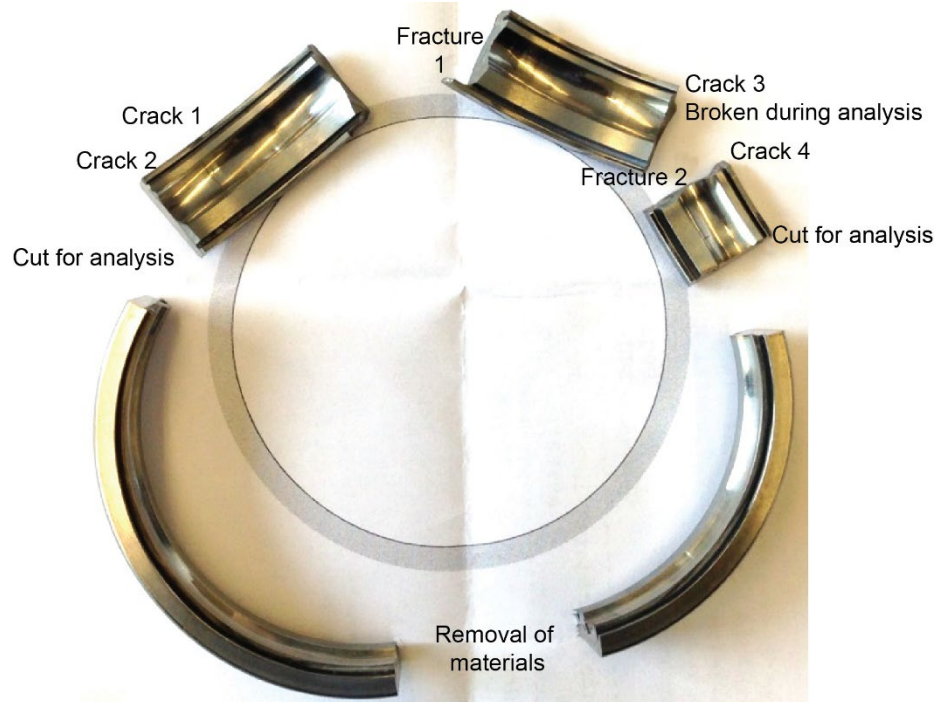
Failed bearing sections with fracture surfaces for further analysis labeled 1 and 2. In addition to the fractures, the bearing has been sectioned in a few locations to aid disassembly while preserving the fracture surfaces.
